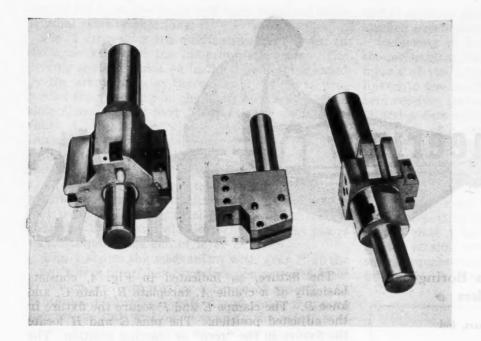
Another Example of Tool-holders and Boring-bars with Square and Rectangular Cutter Holes Broached in the Fixture Shown in Figs. 3 and 4
